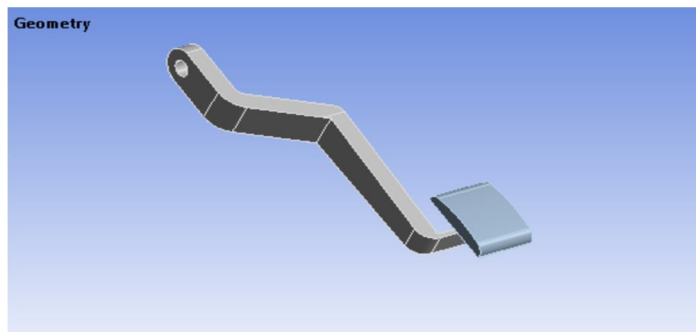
Geometry of Three-wheeler electric vehicle brake pedal
